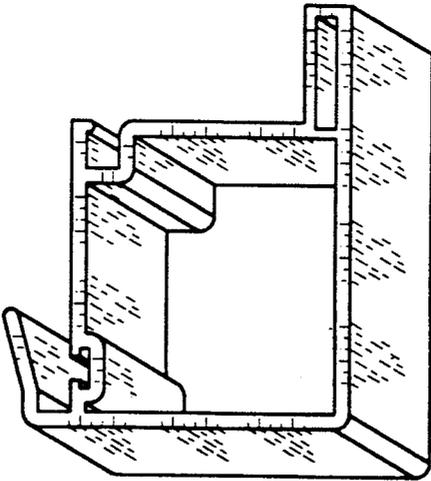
is a perspective view of a window component extrusion showing my new design viewed from the top right; and,
